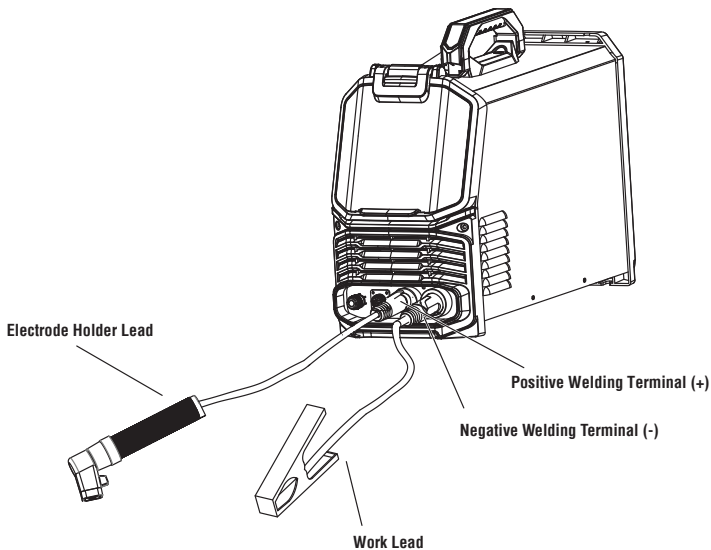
Setup For STICK (MMAW) Welding
